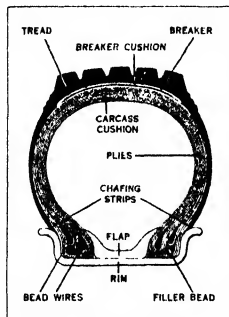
WIRED OR STRAIGHT SIDE PNEUMATIC TYRE ON FLAT BASE RIM WITH DETACHABLE FLANGE
